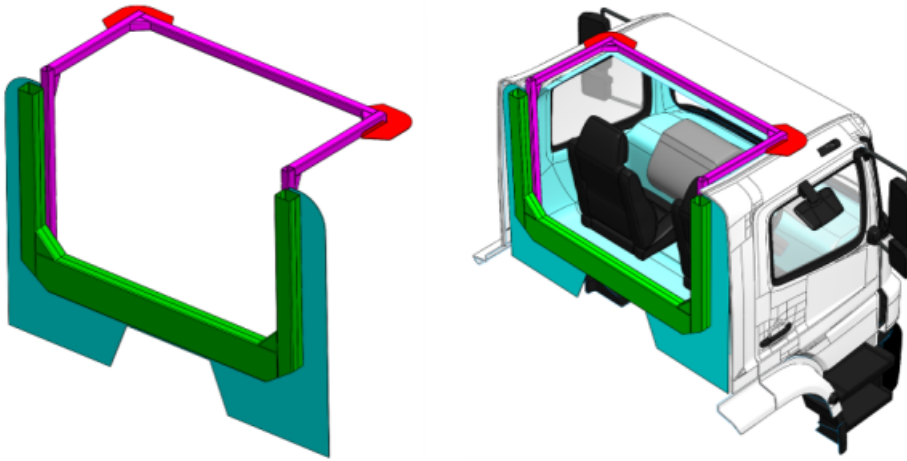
Example of integrated reinforcement for a rear wall and roof cutout
